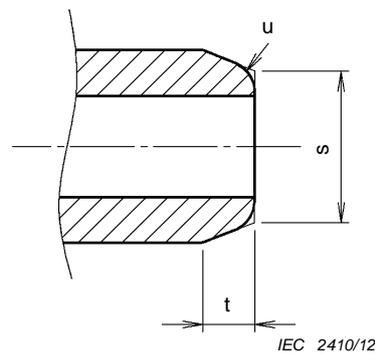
Seal surface area design for MFC power unit side connector (cross-sectional view)
